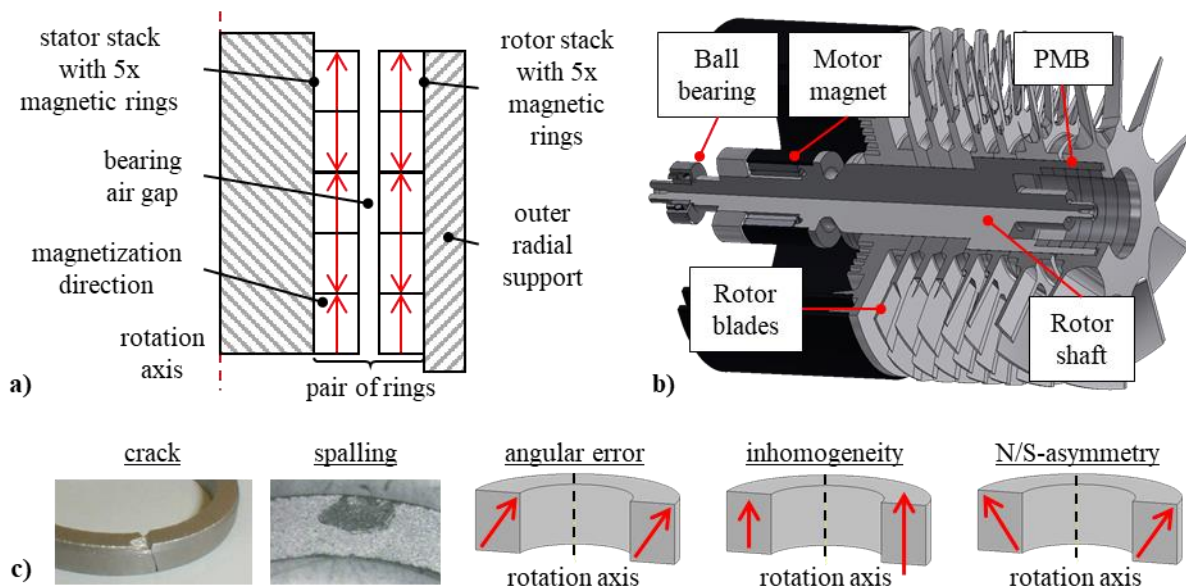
a) Cross-section through the exemplary structure of the PMB of a TMP with 5 ring pairs (not to scale). b) 3D model of a TMP rotor (three-quarter section view) c) Images of mechanical defects such as cracks and spalling as well as relevant characteristics of permanent magnetic rings for quality control: angular errors, inhomogeneities and N/S asymmetries are typical error patterns resulting from intrinsic magnetization properties.
